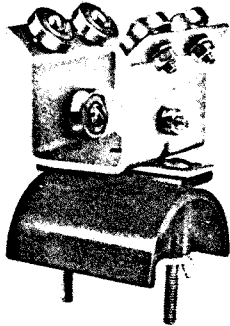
DETAIL TRACK JOINT ASSEMBLY
